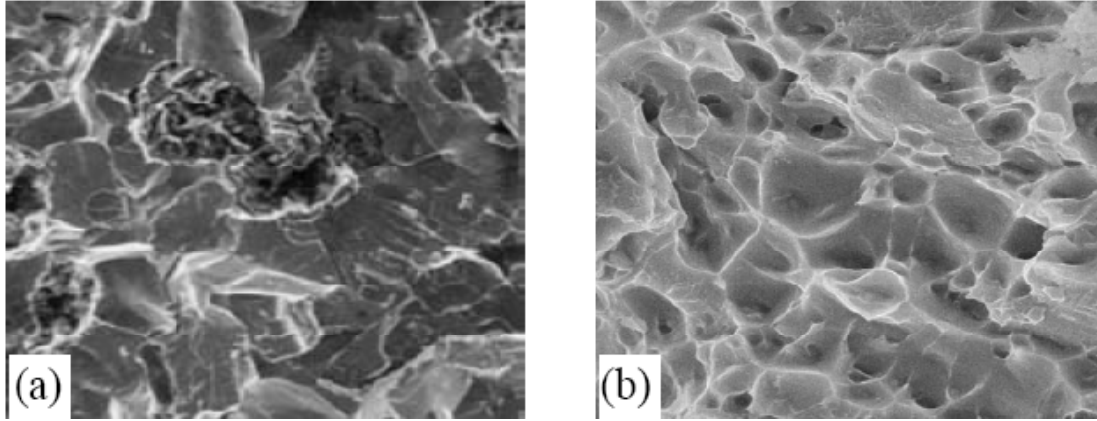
Fractographs showing (a) transgranular fracture and (b) ductile fracture.
